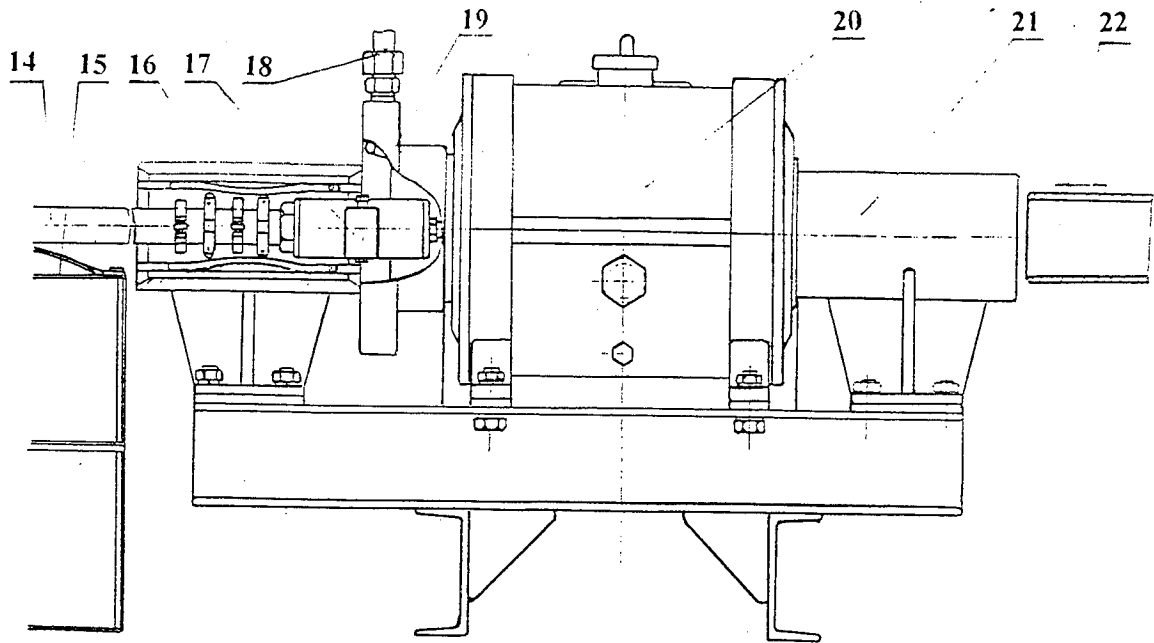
Rotating Head Device for Inner and Outer Surfaces Synchronistical Cleaning
